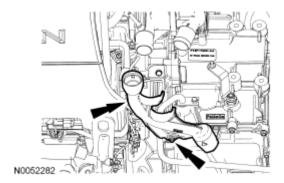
Identifying Transmission Fluid Cooler Tube Bolt Courtesy of FORD MOTOR CO.
